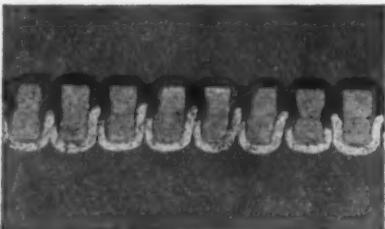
An enlarged view of stitching when tensions are ideally adjusted so that top and bottom threads interlock halfway between the opposite surfaces of the fabrics.
